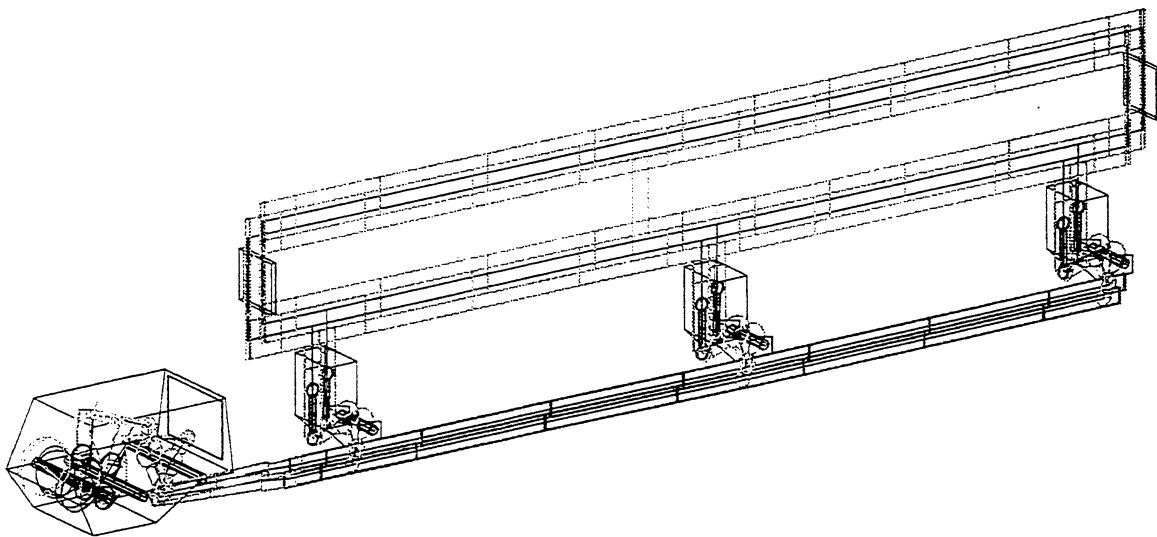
Shedding Mechanism of a Projectile Weaving Machine
